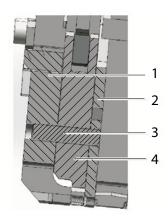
Force transmission level, lateral sectional view through the crimping head
